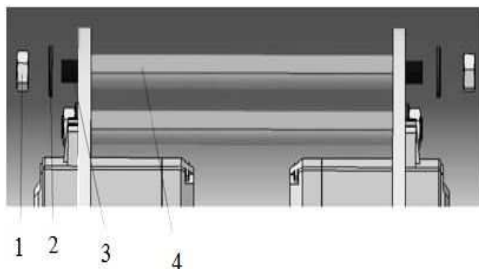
Components of the skeleton: 1-Nut, 2-Bolt, 3-Threaded rod, 4-Aluminum spacer.
